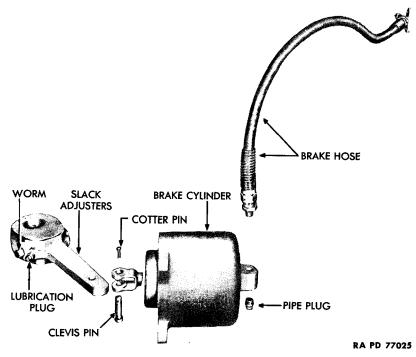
Brake Cylinder, Slack Adjuster, and Connections
